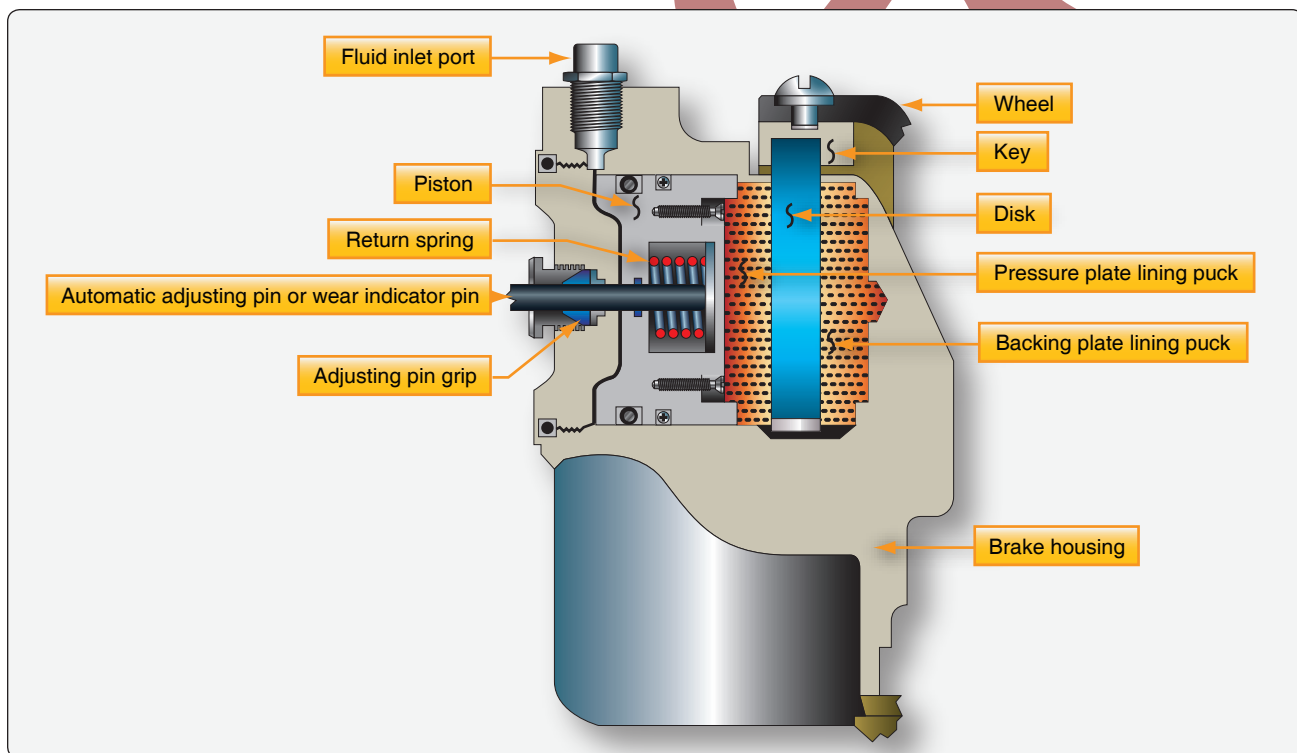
A cross-sectional view of a Goodyear single-disc brake caliper illustrates the adjusting pin assembly that doubles as a wear indicator.
